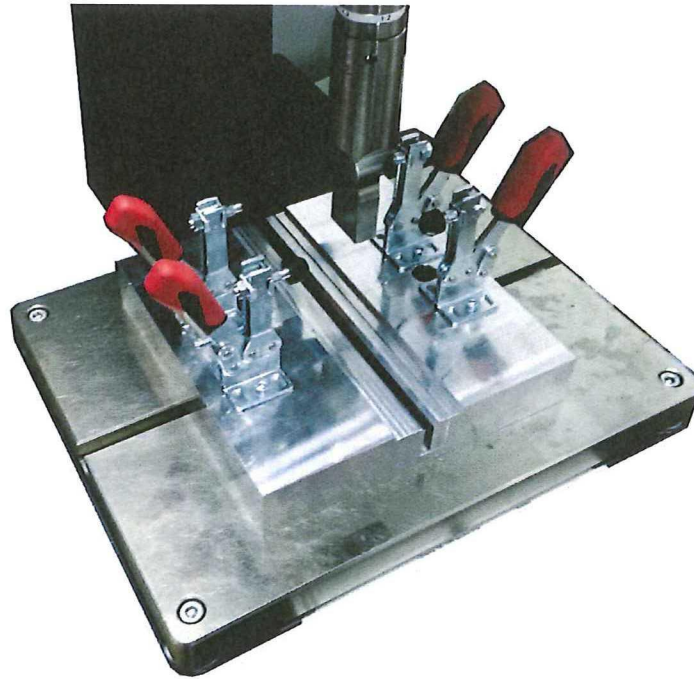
| New jig designed for welding of (chopped fibre) Clean Sky ITD hinges
